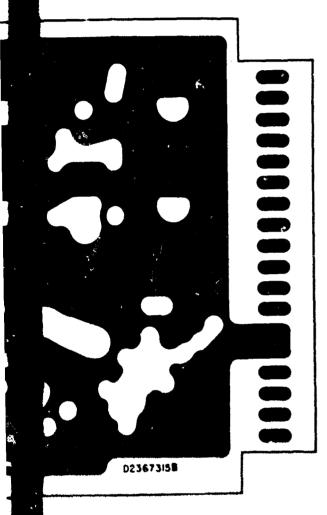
Printed Wiring Board (Drilled) (D2367315)(Sheet 1 of 3)
